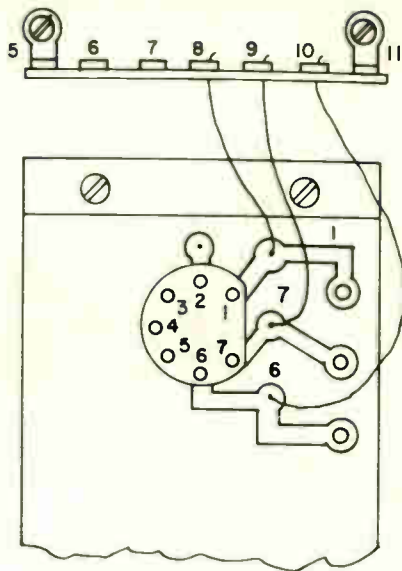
Wiring connecting the tube socket to the terminal strip.
